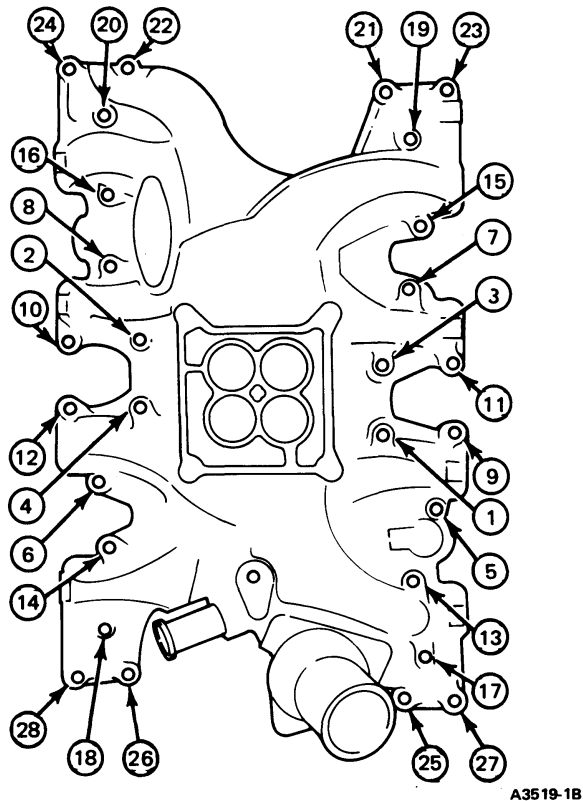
Intake and Exhaust Manifolds Torque Sequence
